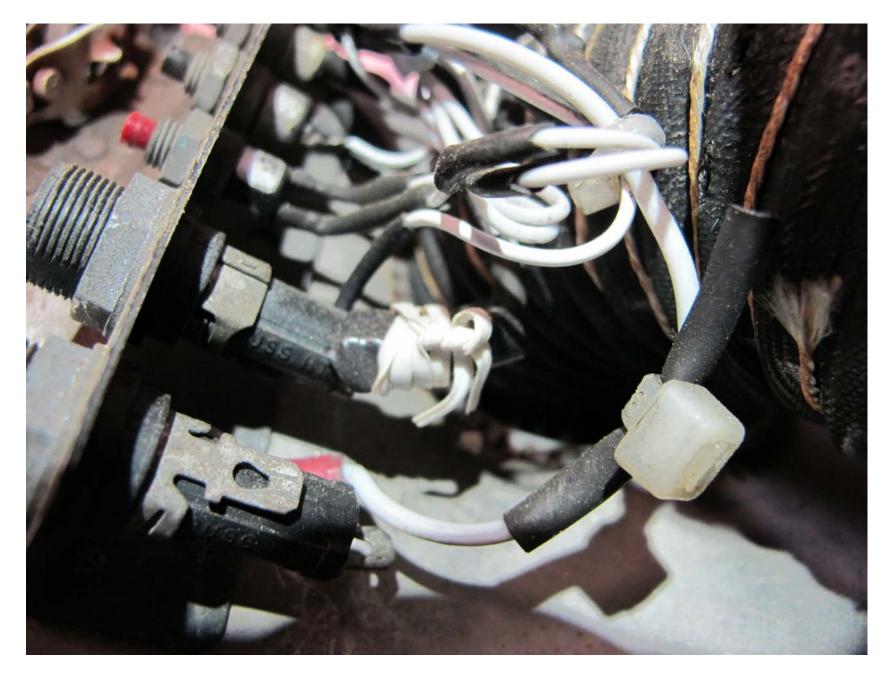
View of wire tie and tape repair on actuator wires (RH Photo)
